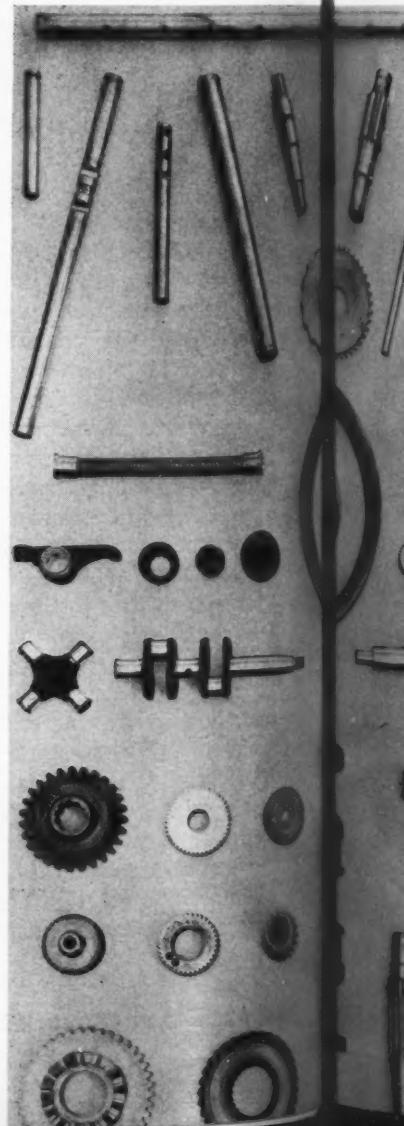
Right—Typical machine parts to which induction hardening is applicable
